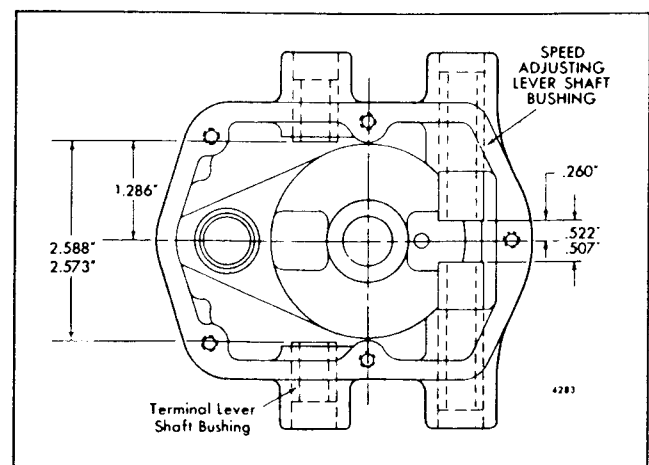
Location of Speed Adjusting Lever and Terminal Lever Shaft Bushings in Governor Housing
